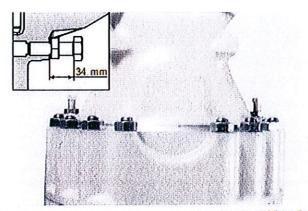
Adjust screws (31) to obtain a distance of 34 ± 0.5 mm between axle machined surface and screw underhead.
